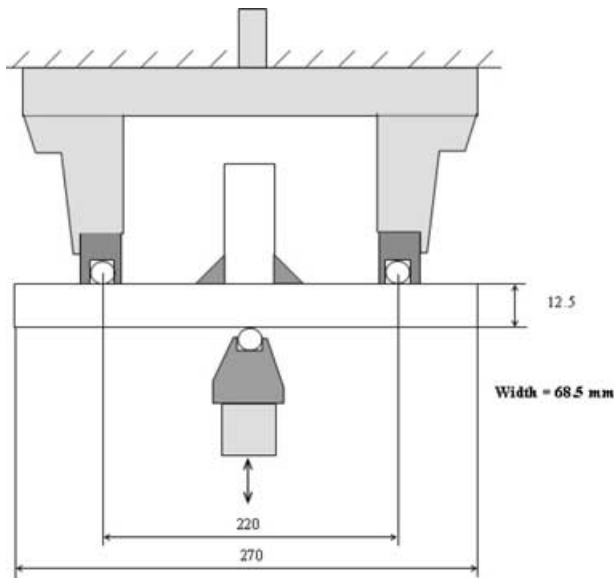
Geometry of the specimens and loading arrangement. 3PB. $R = 0.1$. T-joint. St 52-3 steel.
